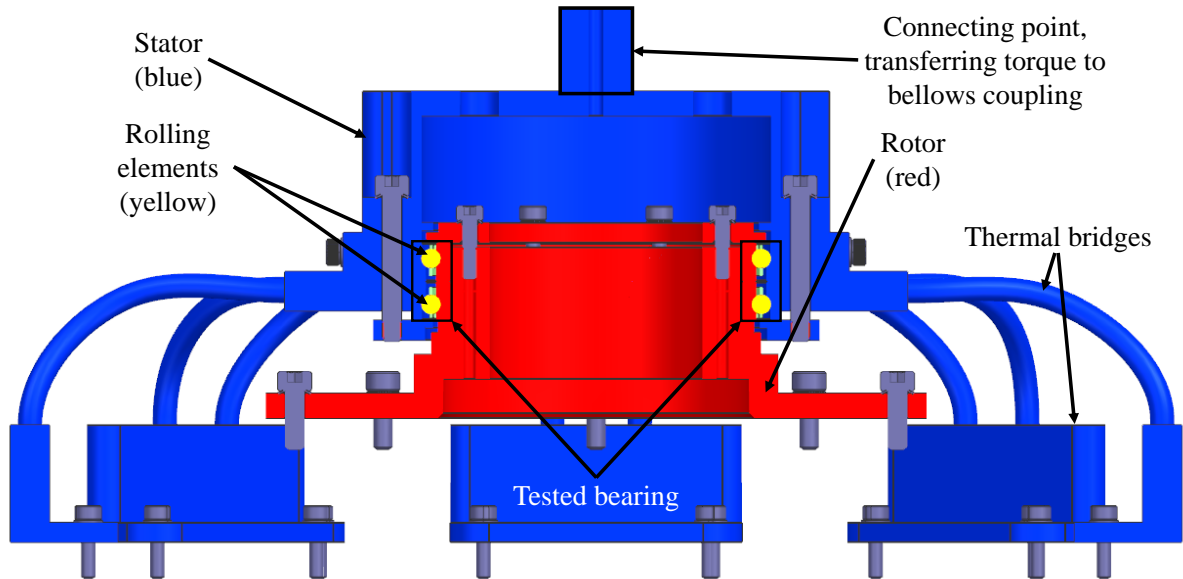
Visualisation of rotary (red) and stationary (blue) parts of the measuring assembly.
